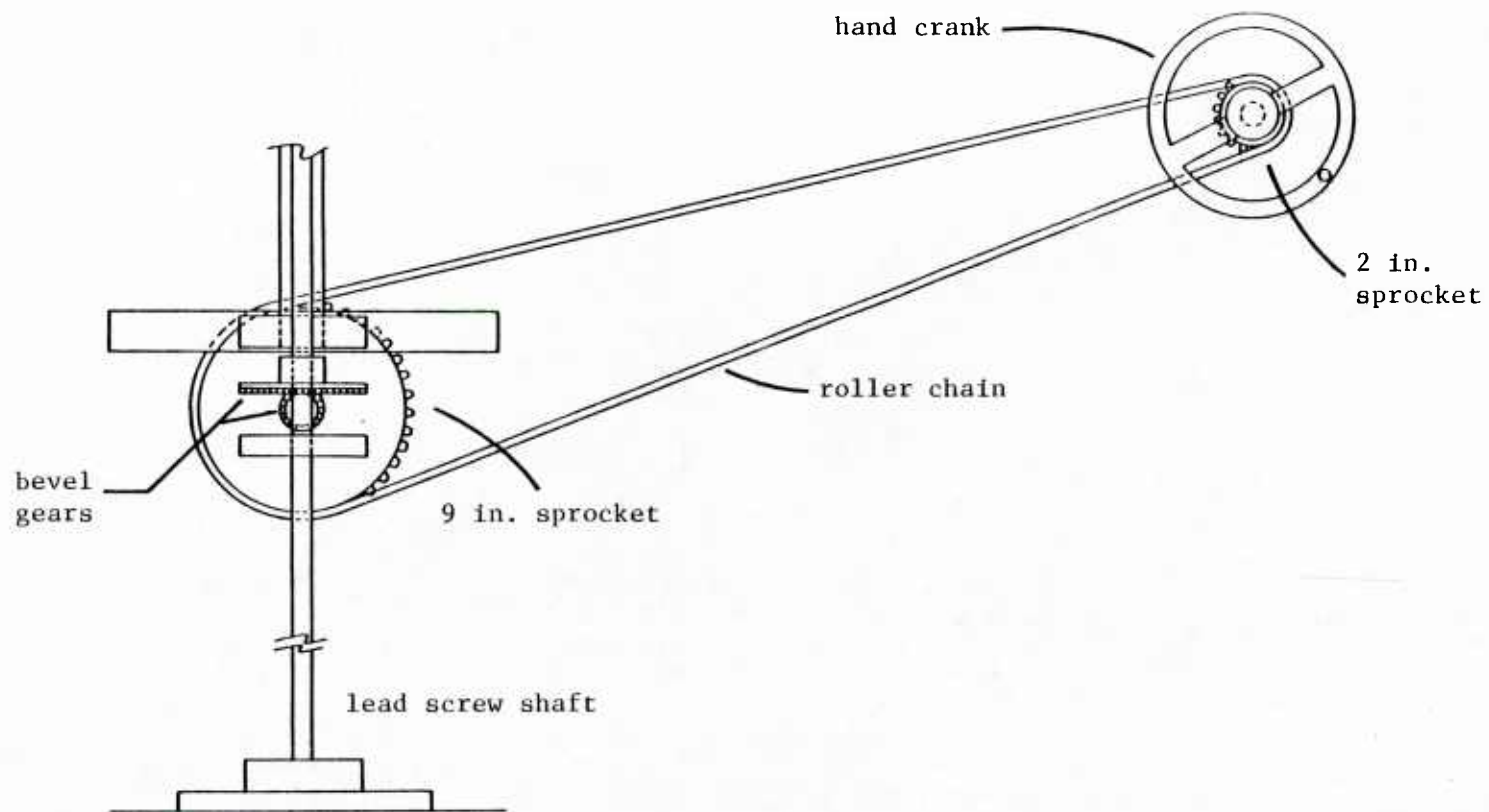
Side View of Lead Screw Shaft Crank Assembly
